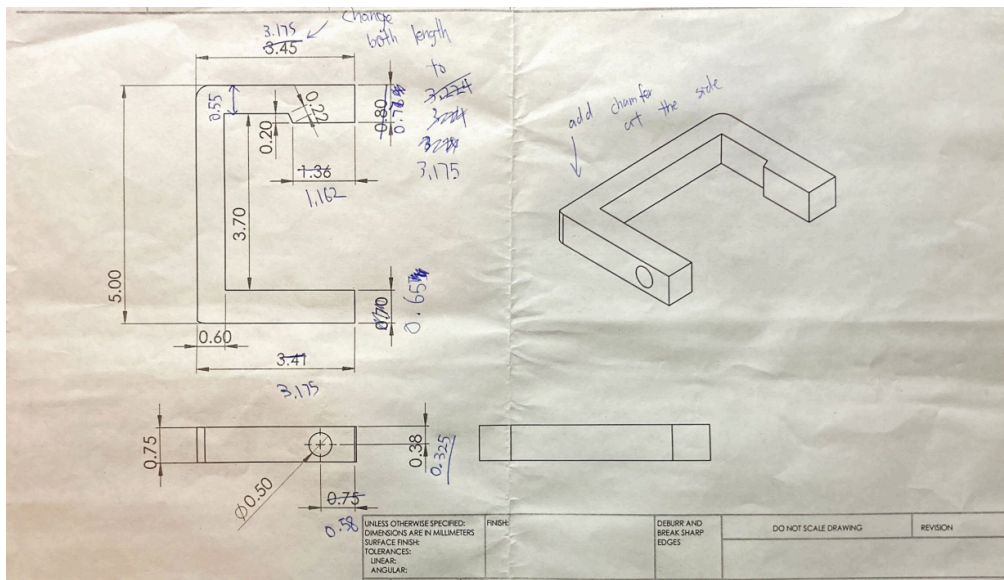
Third Orthographic Drawing for Frame with Changed Dimensions
